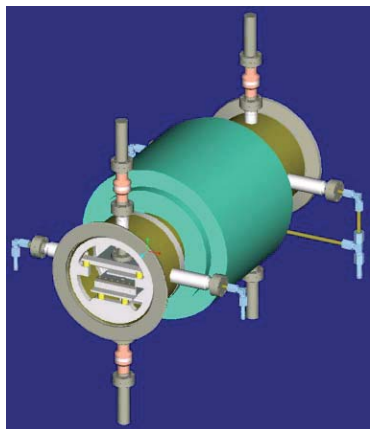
Complete chopper with vacuum tank mounted in a quadrupole [17].
